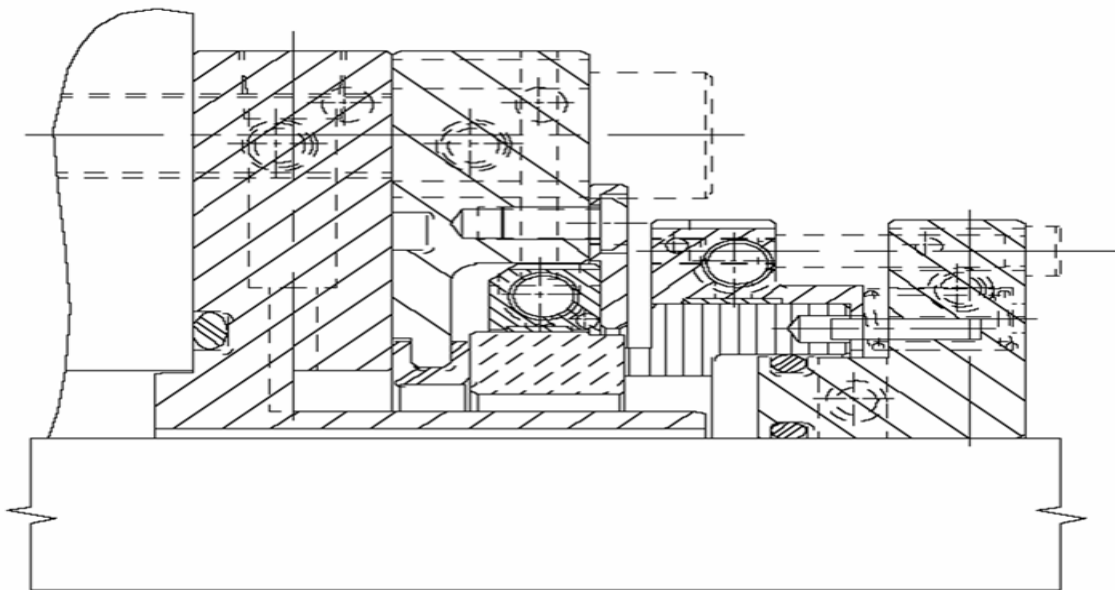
Split single seal with debris well, steam port (Crane 75FS)
